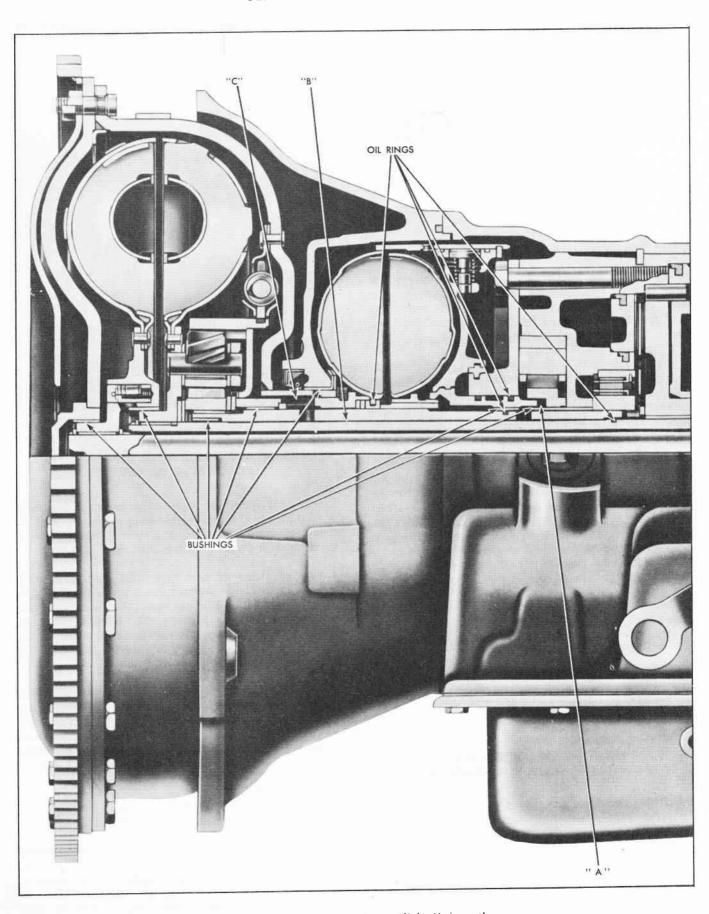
Cutaway View of Strato-Flight Hydramatic
